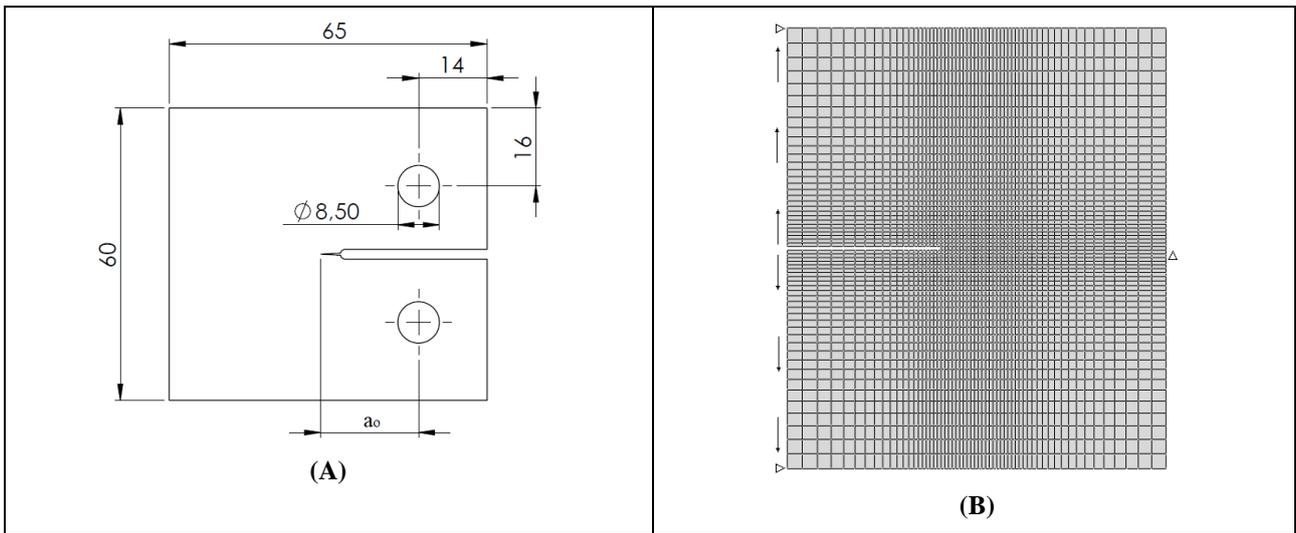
CT specimen configuration: (A) specimen dimensions (in mm), (B) FE Model
